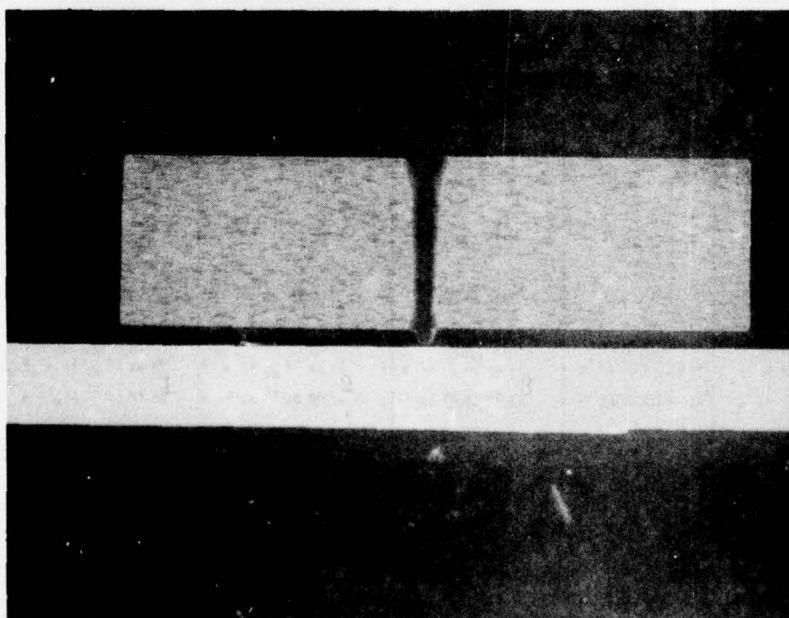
Macro-Section of D6AC Steel Butt Weld
